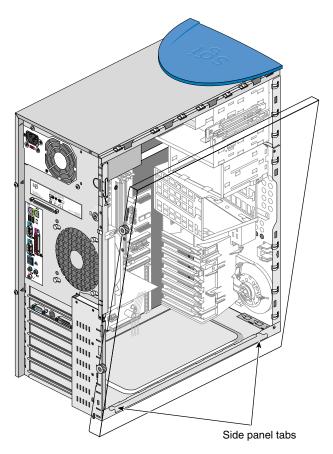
Placing Side Panel onto Lower Chassis Rail
